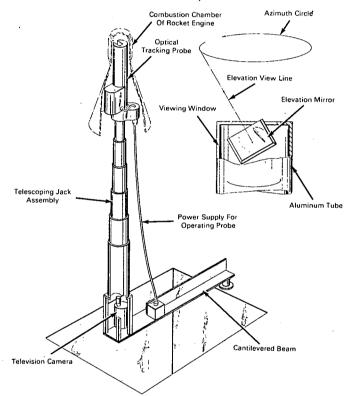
Perspective View of Improved Combustion Chamber Optical Probe.
